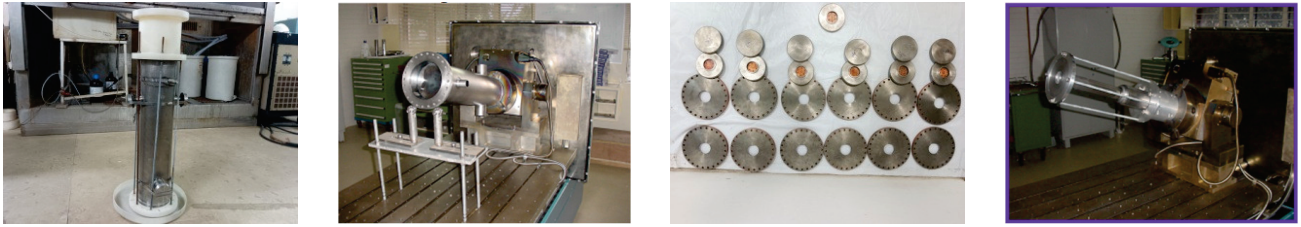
(L to R) a QWR setup for electropolishing, setup showing the EBW of open end flange to niobium outer housing, slow tuner bellows along with their Nb-Cu flanges ready for the final assembly, setup showing the EBW of a niobium central conductor to top flange.
